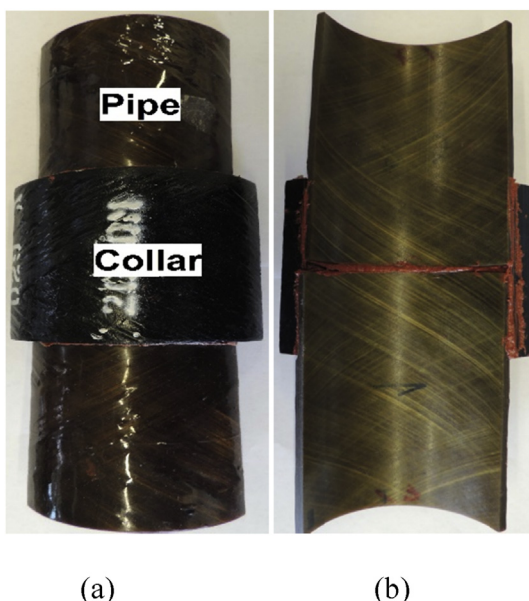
Adhesive composite joint viewed from (a) outside and (b) inside.
